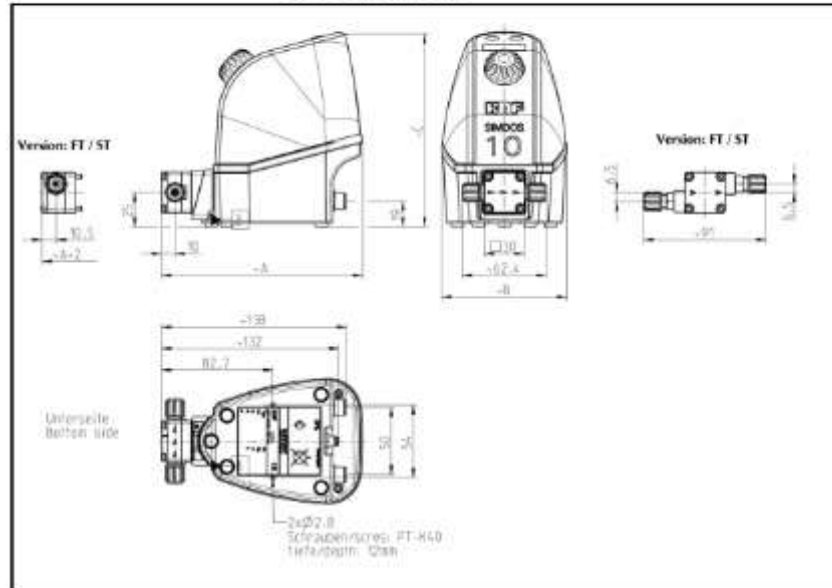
Mounting measurements (measurement tolerances as per DIN ISO 2768-1, tolerance class V)
